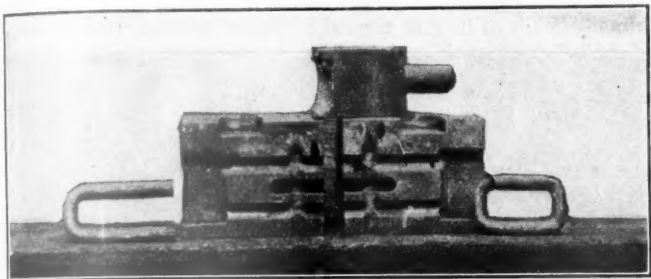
Dies for Welding 3/4-In. End Gate Hinge Link
